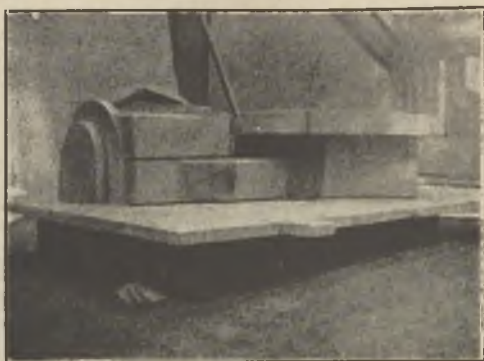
COMMENCEMENT OF MAKING A CYLINDER, SHOWING THE FIRST PIECE OF PATTERN MOUNTED ON THE PATTERN PLATE.
